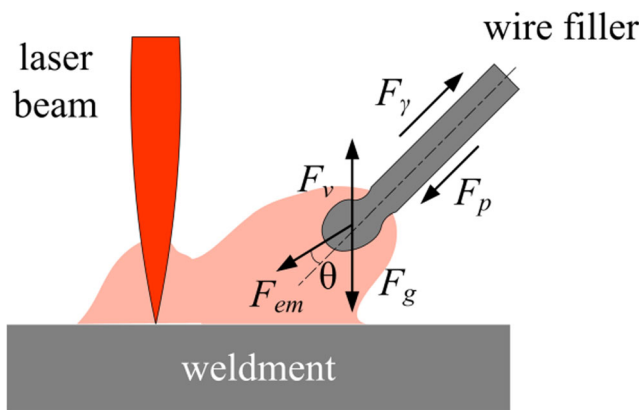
Schematic drawing of forces acting on the pendant droplet in the hybrid welding
